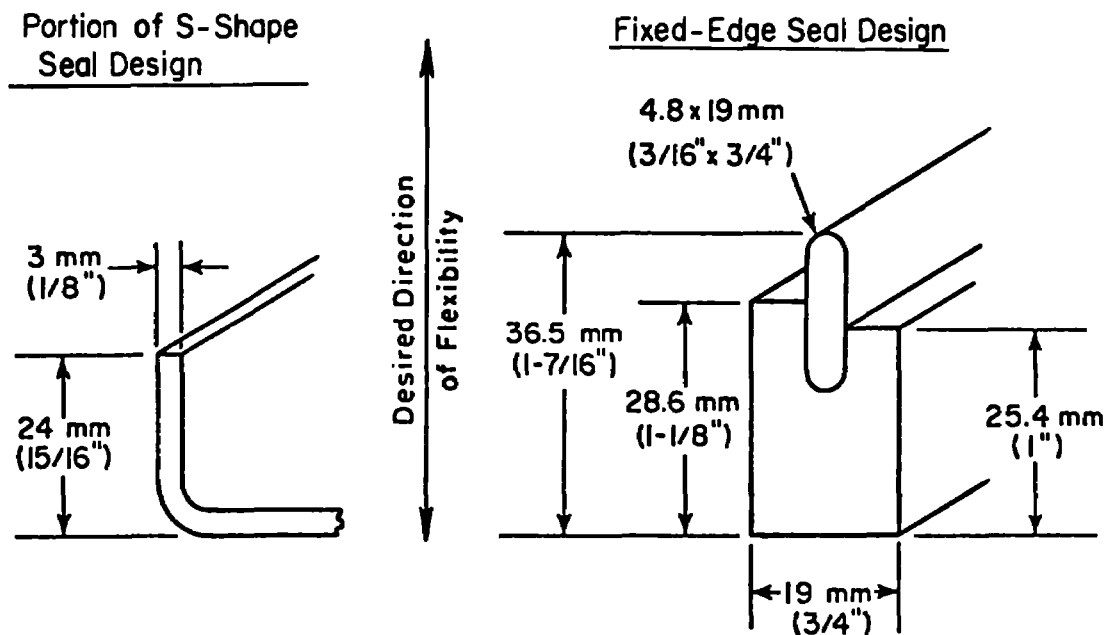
FULL-SCALE SHAPE AND DIMENSIONS OF THE SEAL-EDGE COMPONENTS OF COKE-OVEN DOORS
